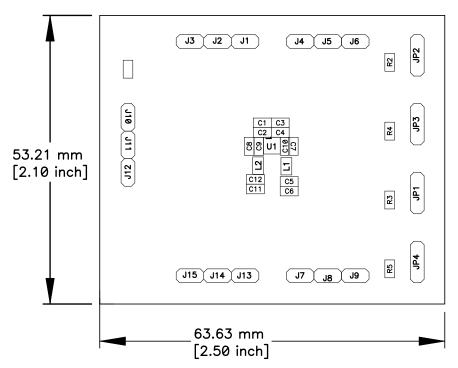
TPS657051/2EVM Component Placement, Viewed From Top
